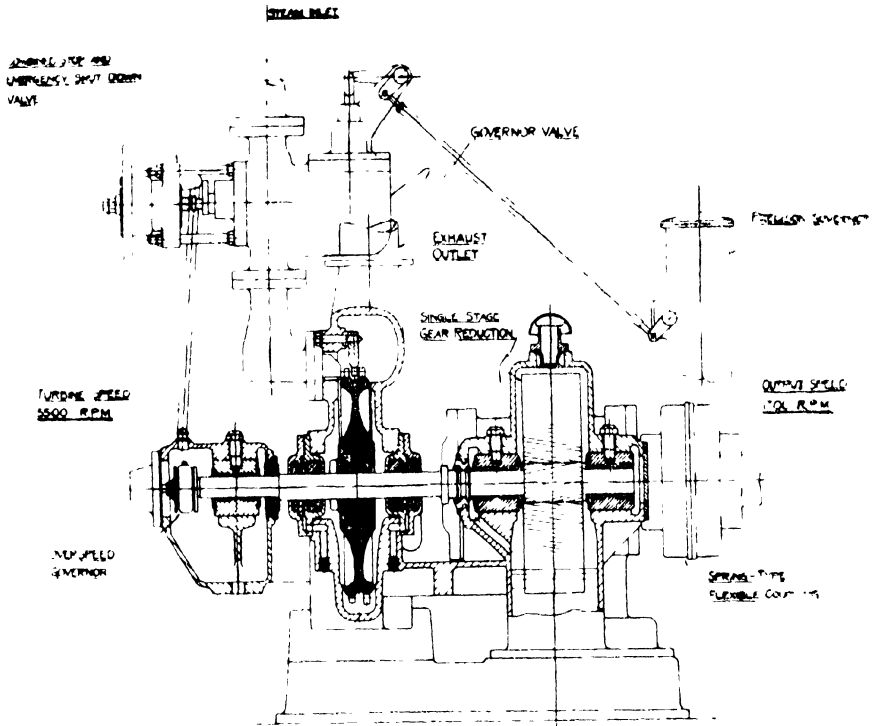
Single-wheel steam turbine with combined single stage reduction gear.
